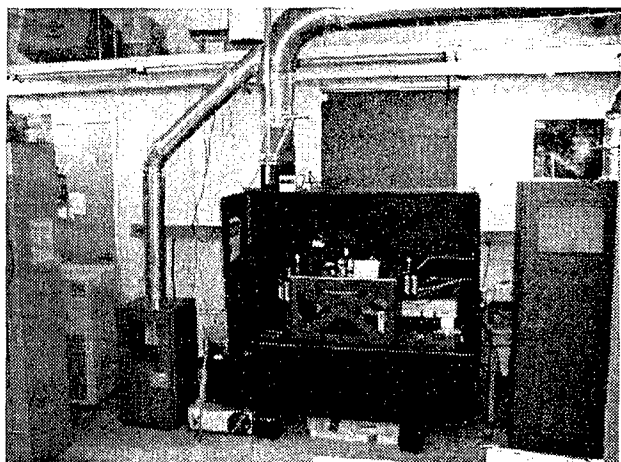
Ensemble view of the Steward Observatory laser micromachining system
